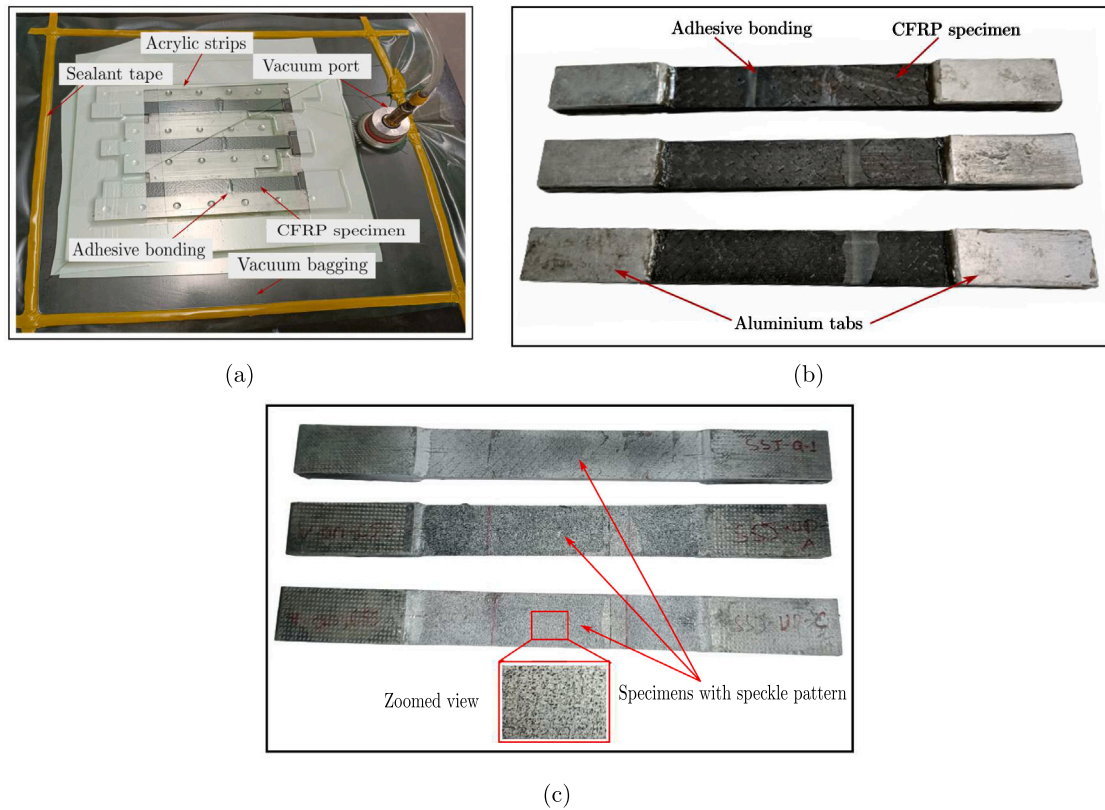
Bonding of the CFRP adherends: (a) specimens under the vacuum bagging, (b) fabricated adhesive bonded specimens with aluminium tabs, and (c) specimens with speckle pattern.
